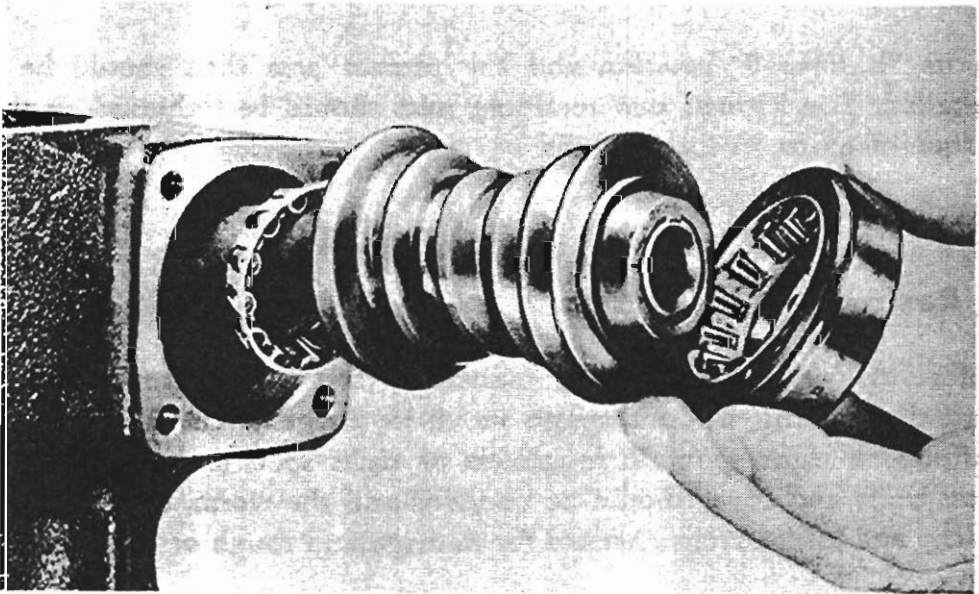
Pull the Worm and Shaft Assembly and the Worm Bearings Out Through Forward End of Case.
